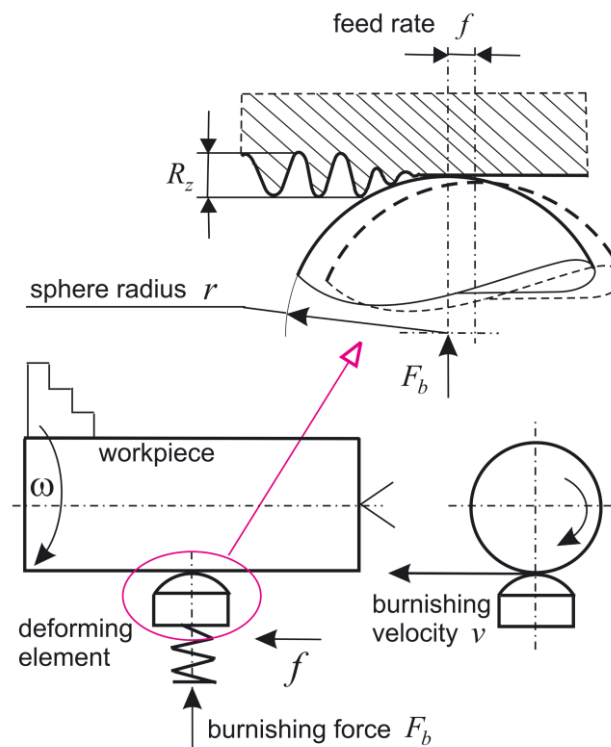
Slide diamond burnishing kinematics and parameters [75]
